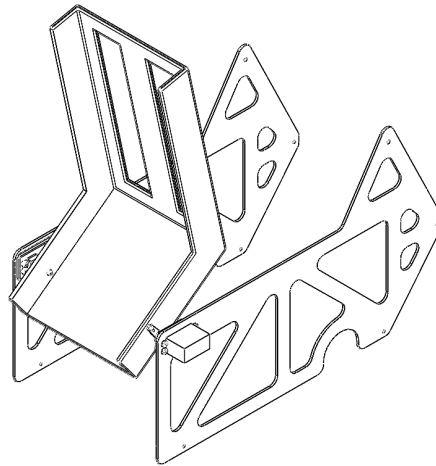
Mounted Bucket Mechanism - [Engineering Drawing](#)
